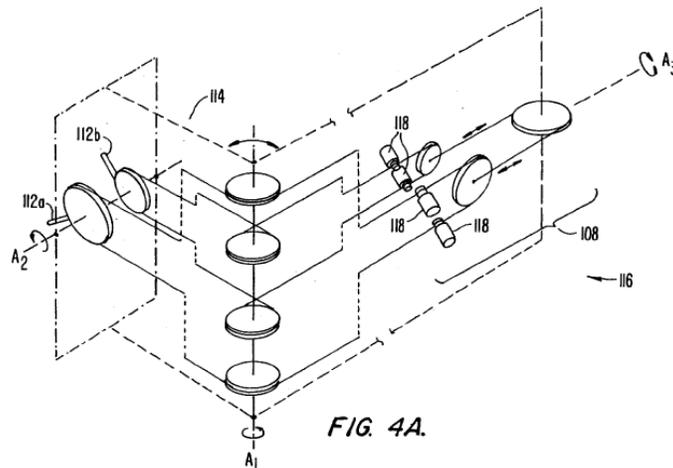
A is a schematic view of a drive system for the tool of Figure 4. Ex.1001, 5:64–65. Drive system 116 mechanically couples first and second end effector elements 112a, 112b to driven elements 118 of interface 110, and translates mechanical inputs from driven elements 118 into articulation of wrist 114 about first and second axes A1 and A2. *Id.* at 9:24–31. Interface 110 is depicted in Figure 6, reproduced below:
